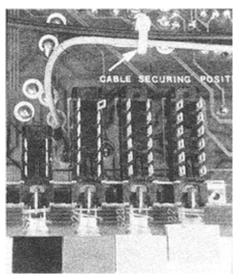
Underside of part of the PCB shown in Figure 9. See note 22.
